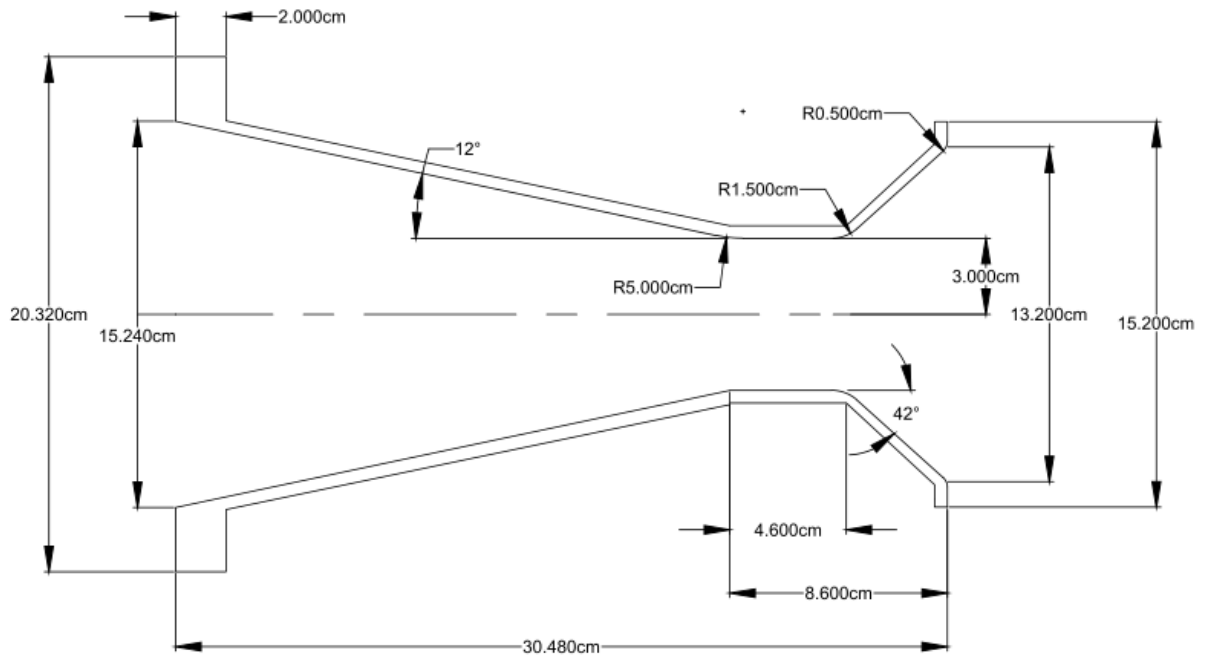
Dimensions of the compact radiating system to be built and tested.
